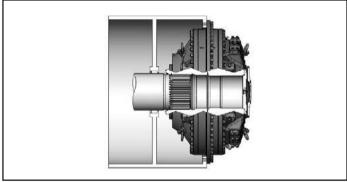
Flange mounted motor with splines and low radial load from driven shaft.
